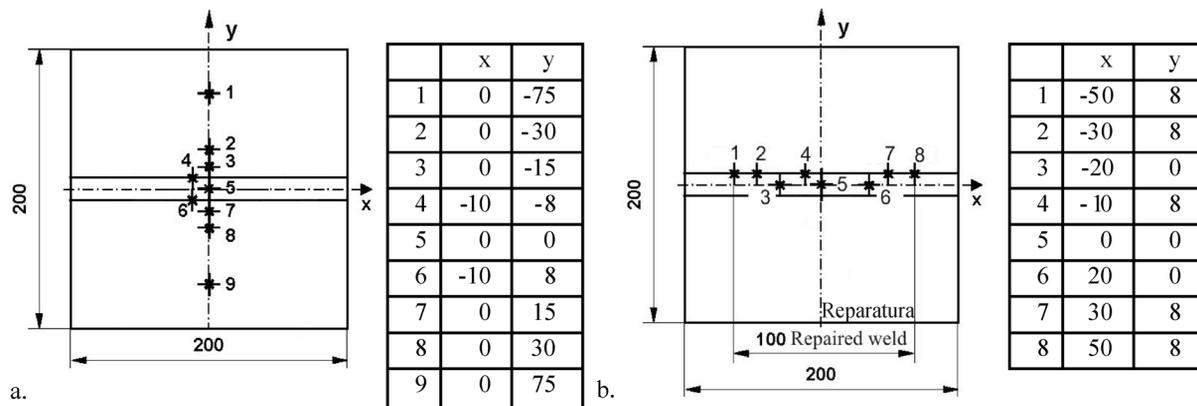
Location of the residual stresses measurements on the welded plates, (a) for three different welding conditions and (b) for repair welding
